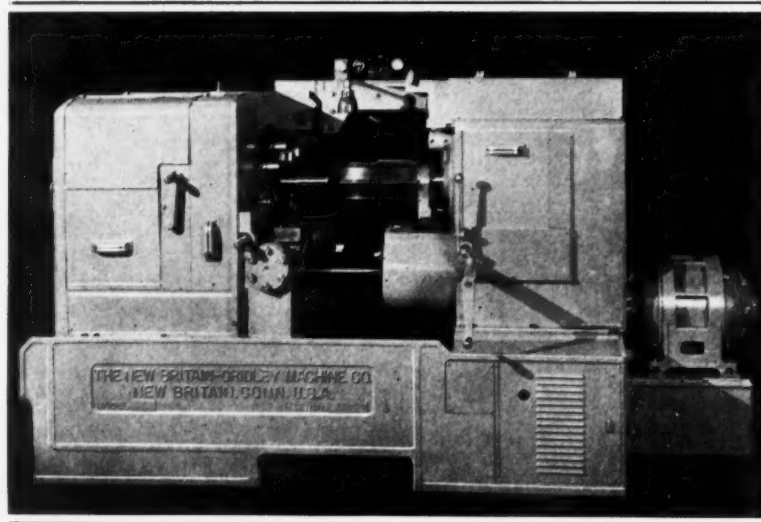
New Britain Six-spindle Work-rotating Chucking Machine of 5 3/4 Inches Capacity
